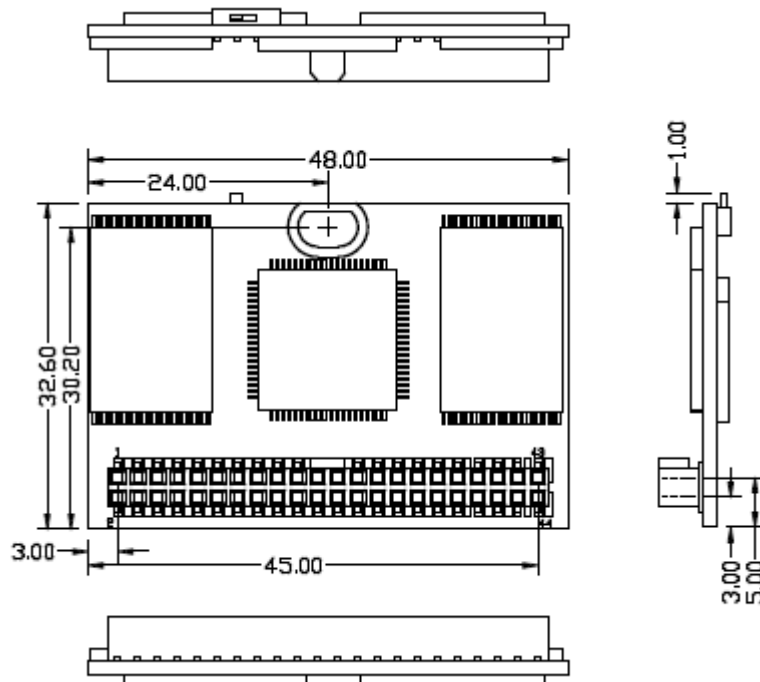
Mechanical Dimension of EDC4000 44-pin (Horizontal Female Type A)
